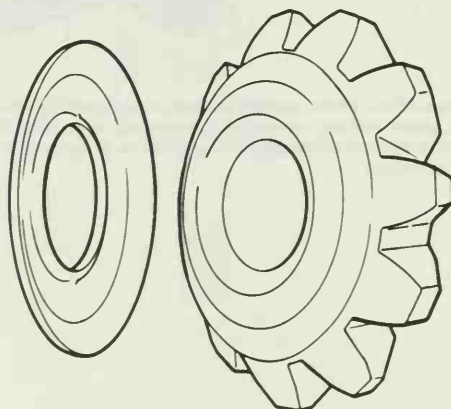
New thrust washers are installed on the differential gears. (American Motors Corporation)
